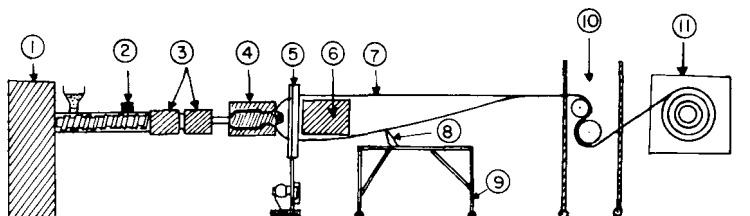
Schematic of the Foam extrusion line: (1) extruder; (2) blowing agent injection port; (3) static mixers; (4) tubular die; (5) stand for orientation mandrel; (6) cooling mandrel; (7) foam sheet; (8) slitting knife; (9) stand for slitting knife; (10) takeoff stand; (11) winder.
